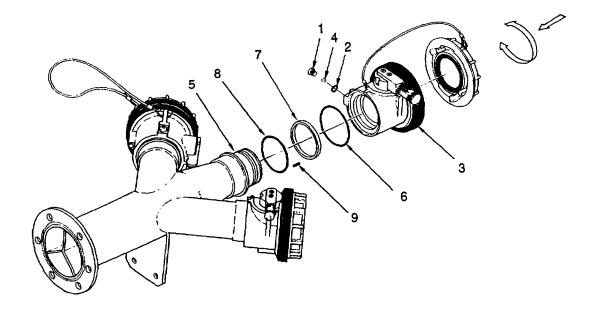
Inlet Manifold Unisex Coupling Replacement
